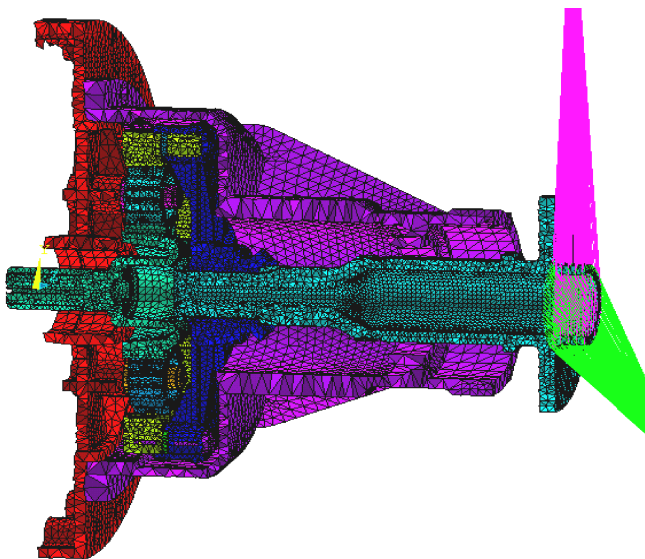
Complete 3D model of gear with propeller shaft and FEM mesh
